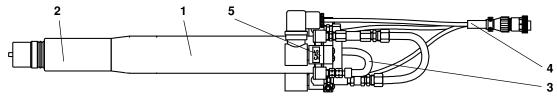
HT2000LHF Standard Torch Assembly with Valve Cluster
